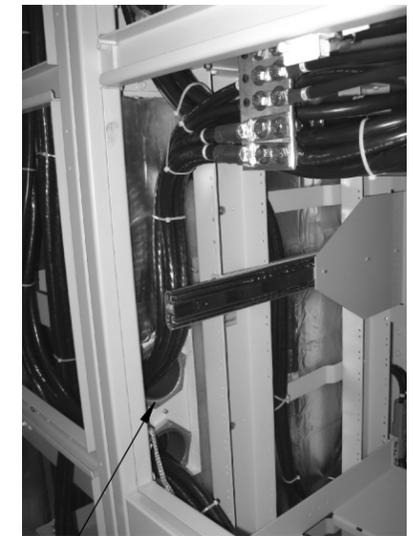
DETAIL B - REAR BATTERY CHARGE TERMINATION PANEL CABLE ROUTING
